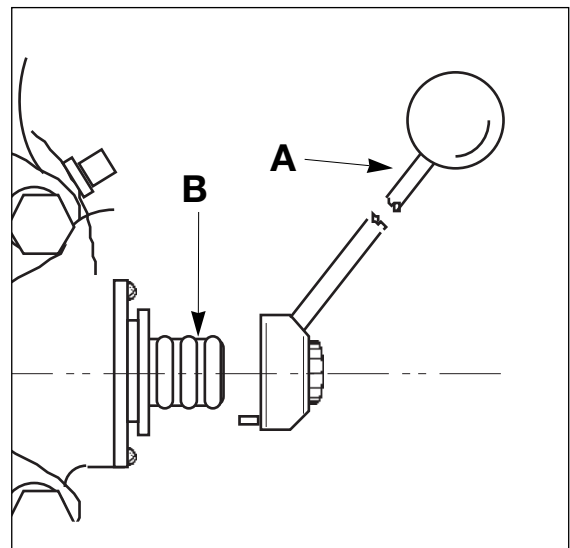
Close Up View of the Quill Feed Handle (A) & Shaft (B)
